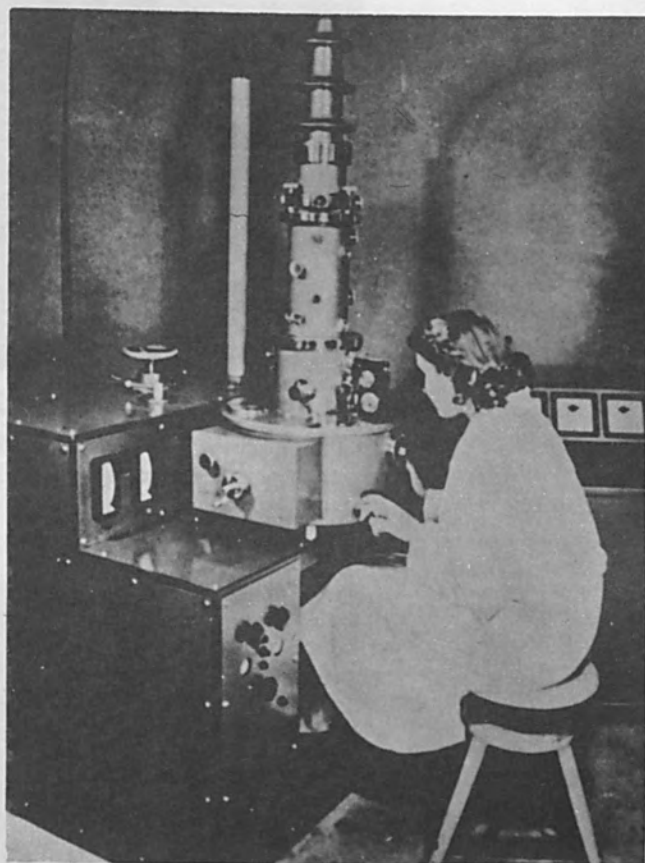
Electron beam welding and milling machine with 1 kw beam power built in the year 1952.
